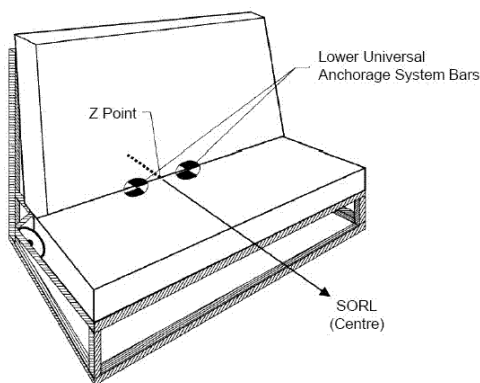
Three-dimensional Schematic View of Standard Seat Assembly Indicating Location of Lower Universal Anchorage System
